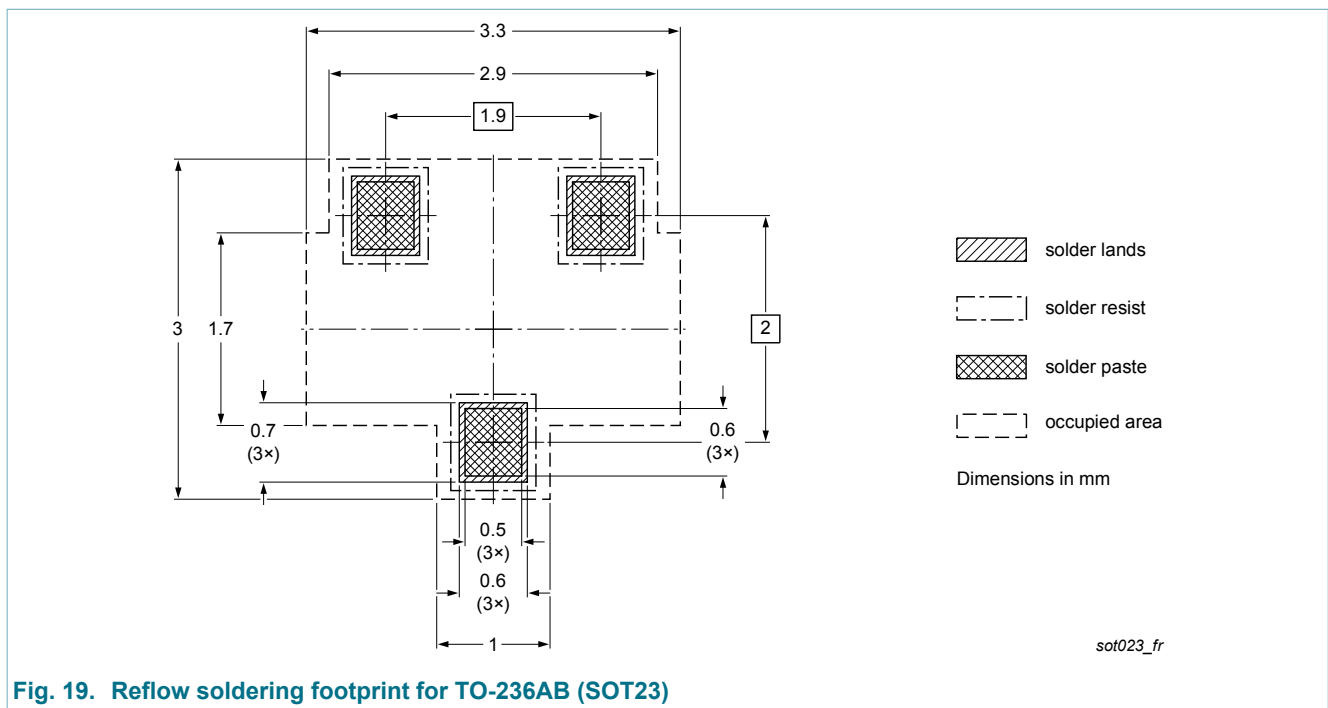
Reflow soldering footprint for TO-236AB (SOT23)
